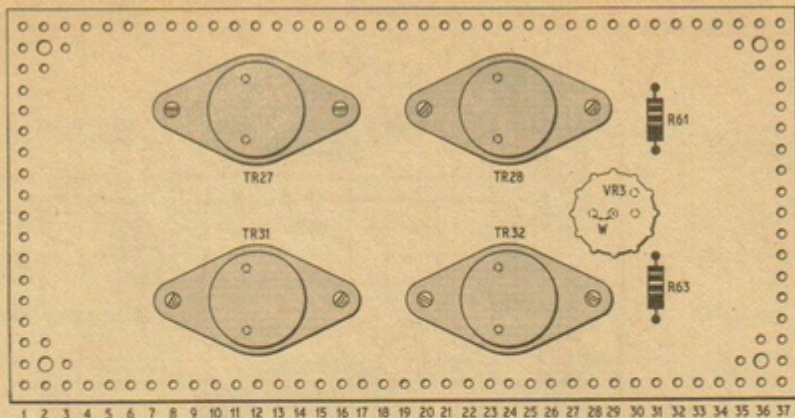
Top view of the motor control board. The board should be drilled to accommodate the OC35 mounting screws and the base and emitter pins. Mounting holes for the board are made at each corner to line up with the Meccano mounting strips
